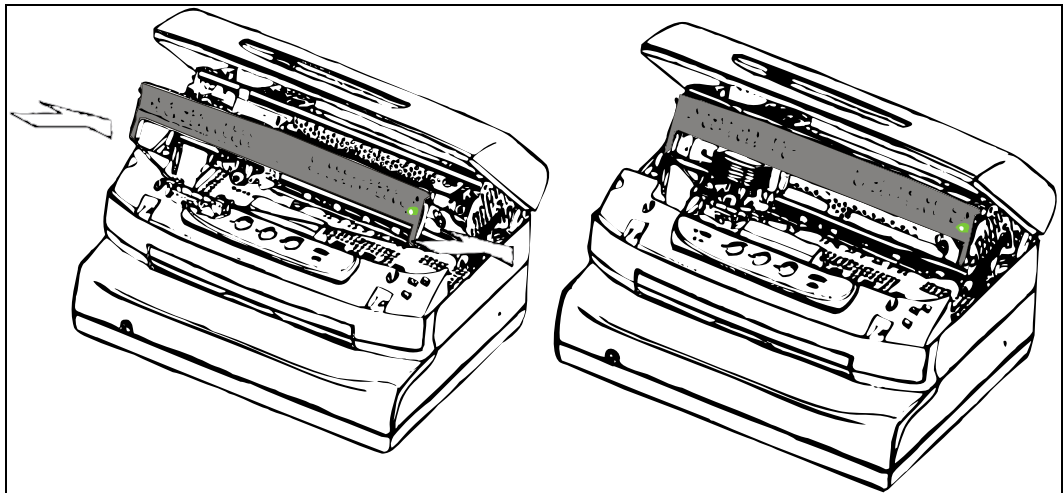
Insert ribbon cartridge onto the scrolling gear and lock its two ends with related slots.
